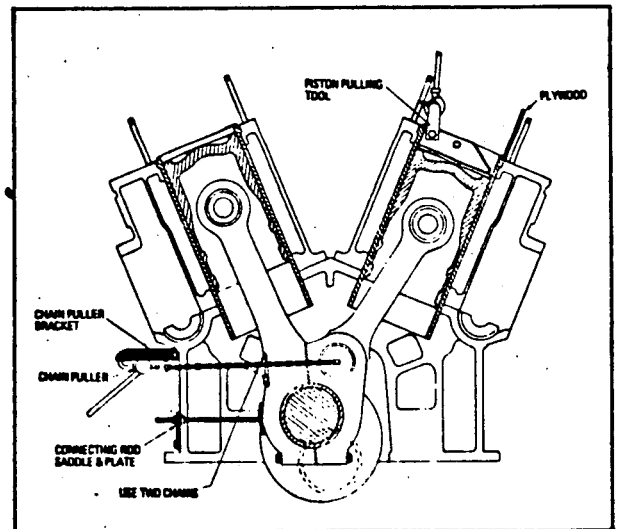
C-3. Tools Installed For Removing Piston and Link Rod.
